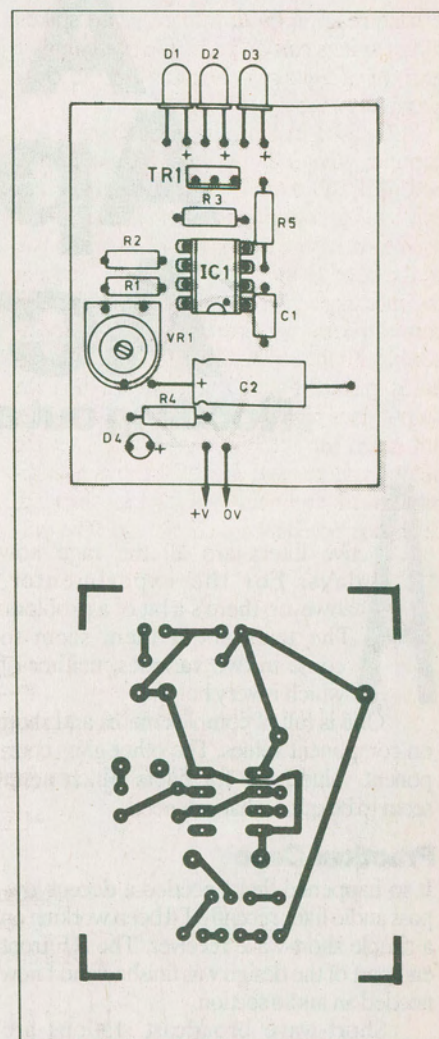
The component overlay (top) and the PCB for the transmitter.
